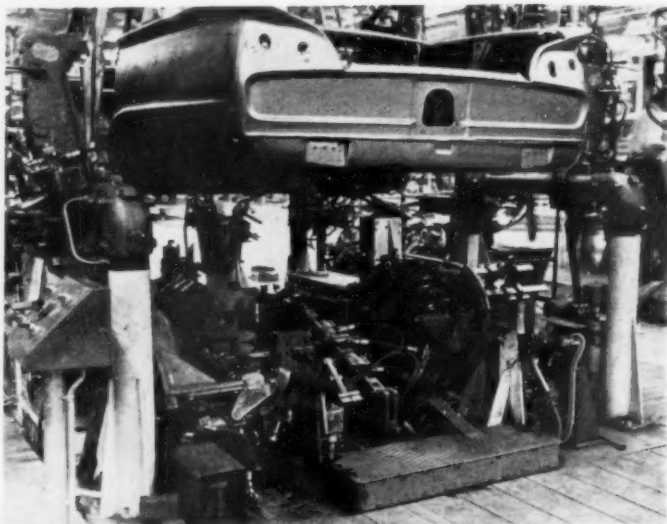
(below).—General view of part of Consul Classic assembly line. In left foreground is lift bringing underbody from under floor conveyor. In right foreground underbody and balloon assembly are joined in fixture in which underneath welds are effected by multi-welder built into fixture. Above-floor welds are completed by hand spot-welders
